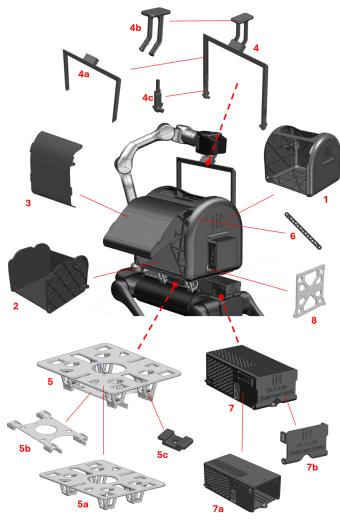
This image presents a detailed mechanical engineering CAD design and the assembly of the selected mechanism, including part numbers.
